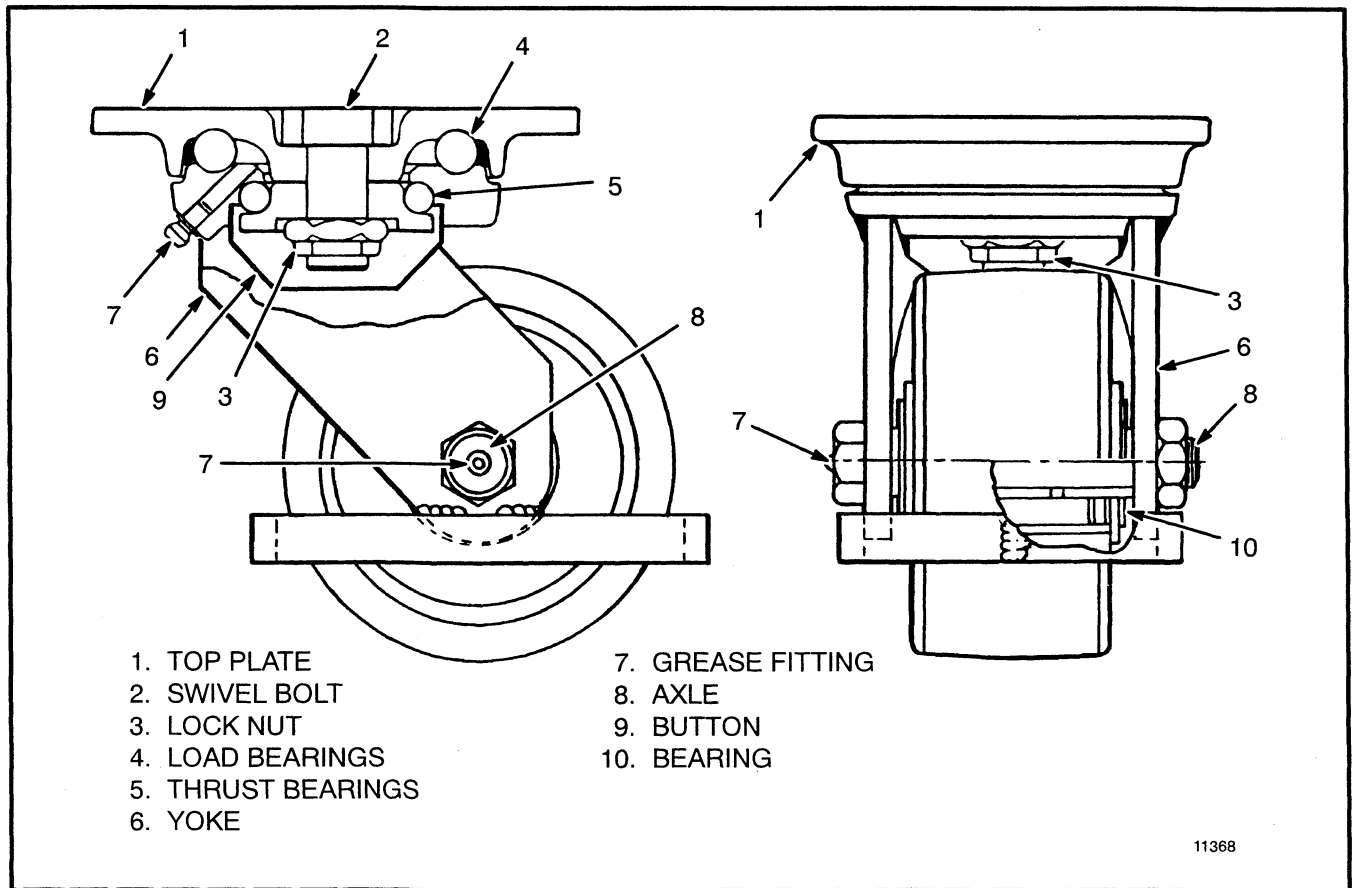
OPTIONAL CASTERS - W40-60XL
